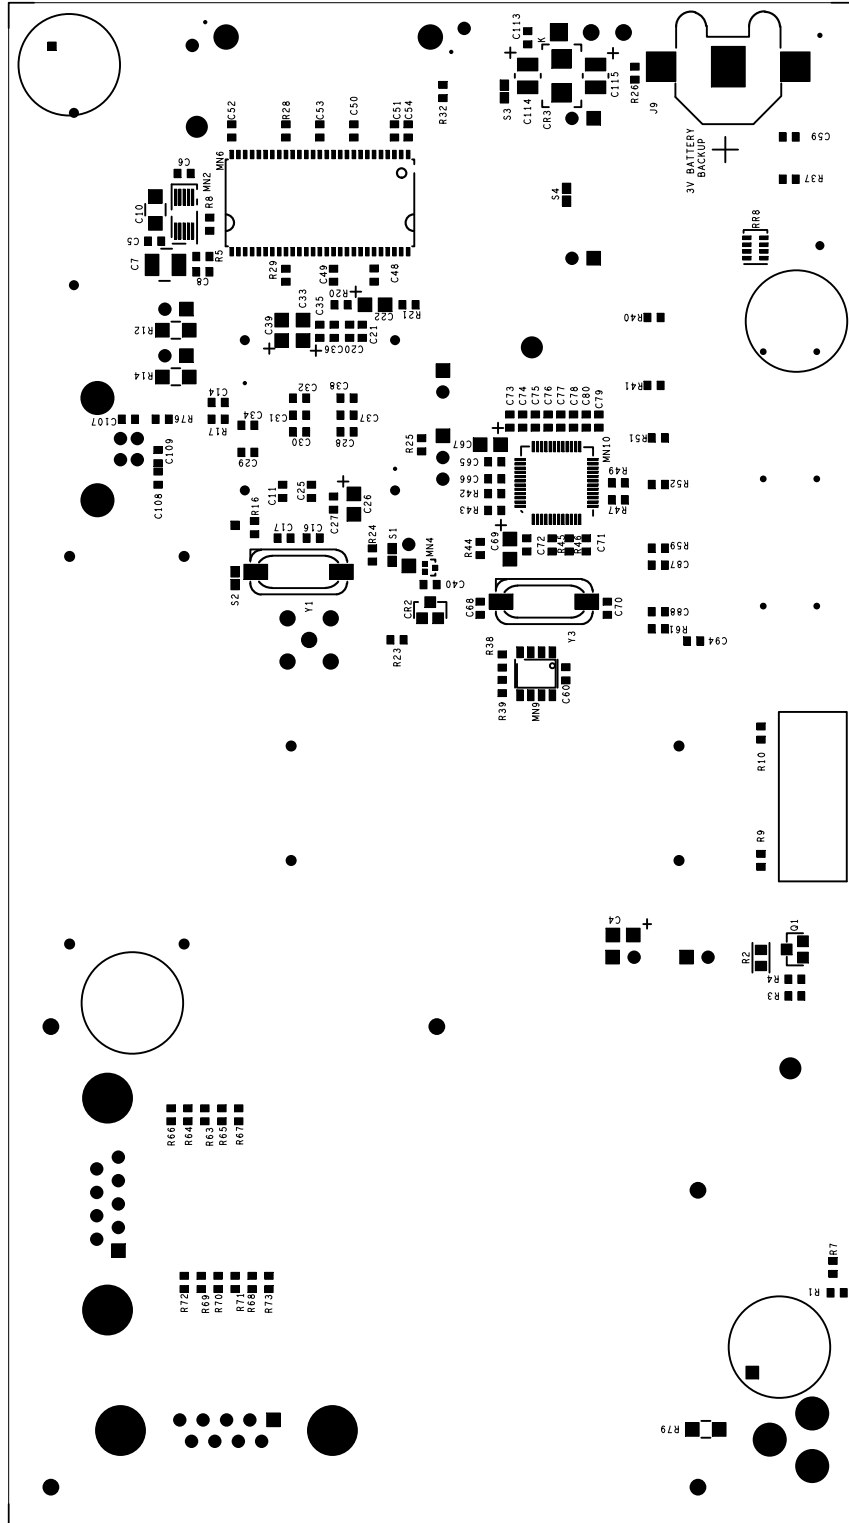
AT91SAM9RL-EK Layout - Bottom View
